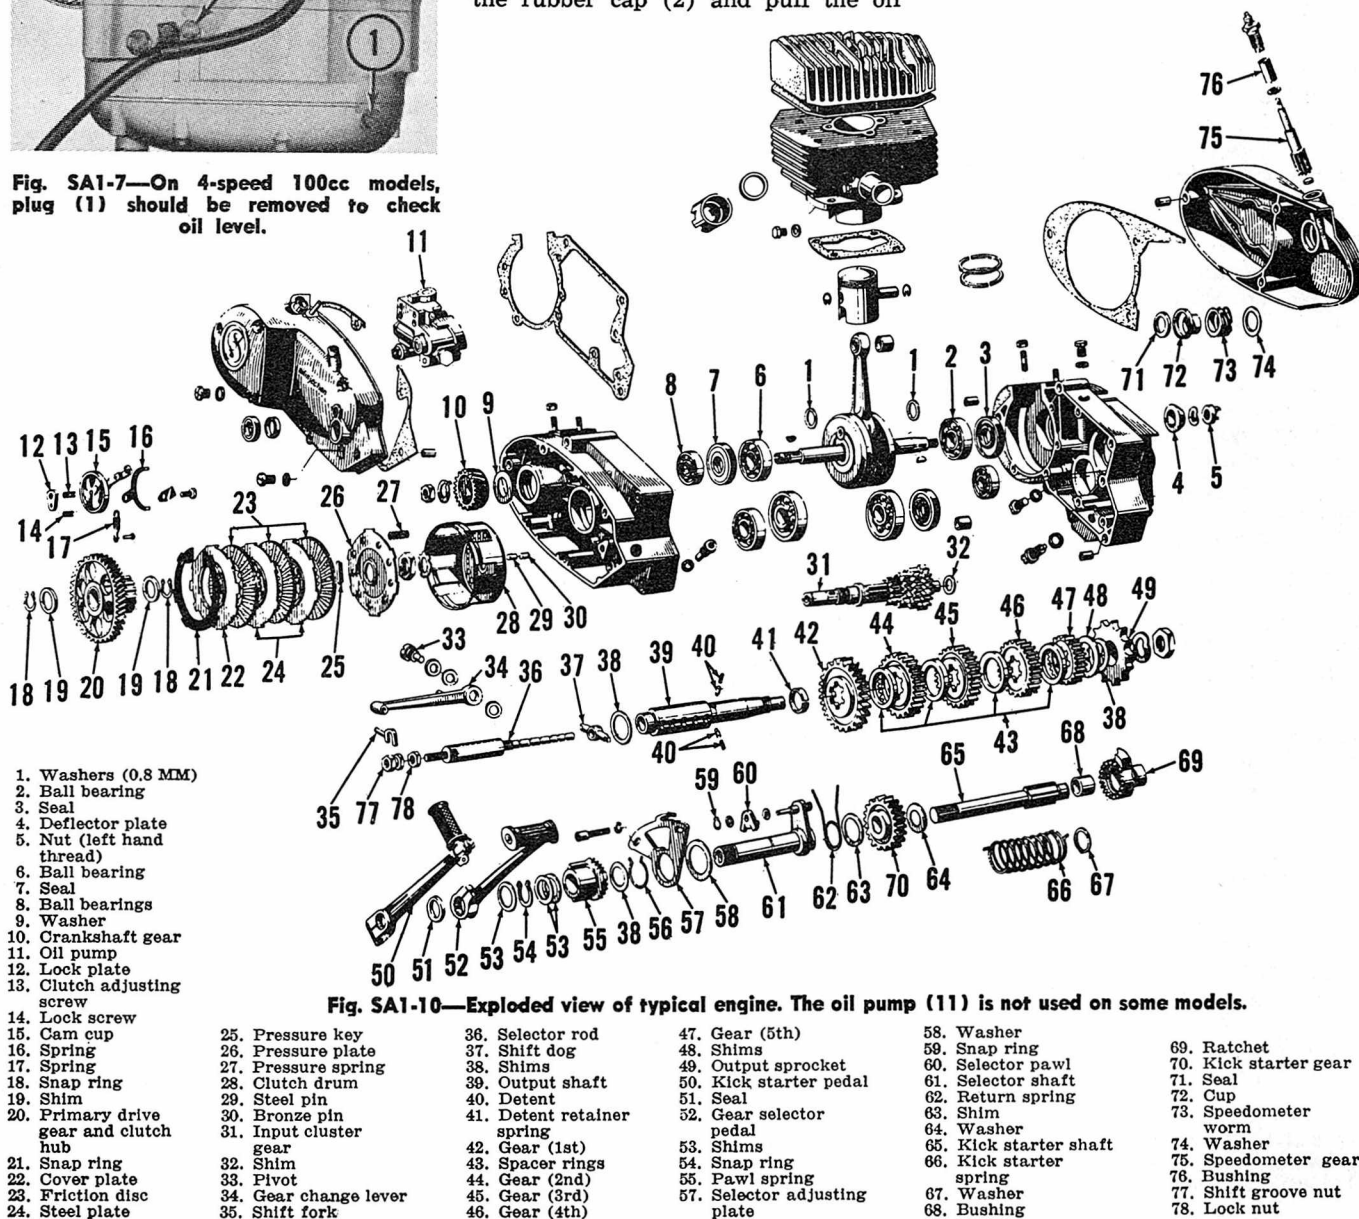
Exploded view of typical engine. The oil pump (11) is not used on some models.
